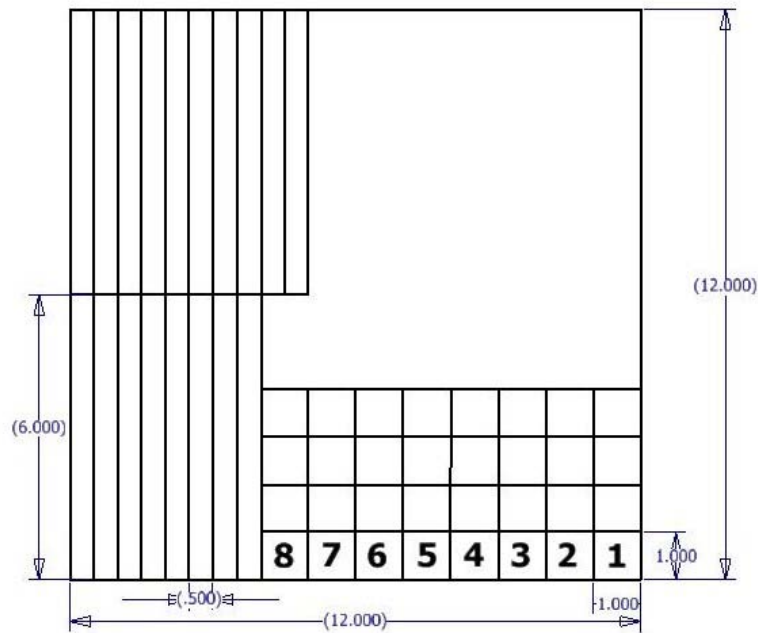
1" X 1" test specimen cut from carbon-carbon panel at each stage of processing.
